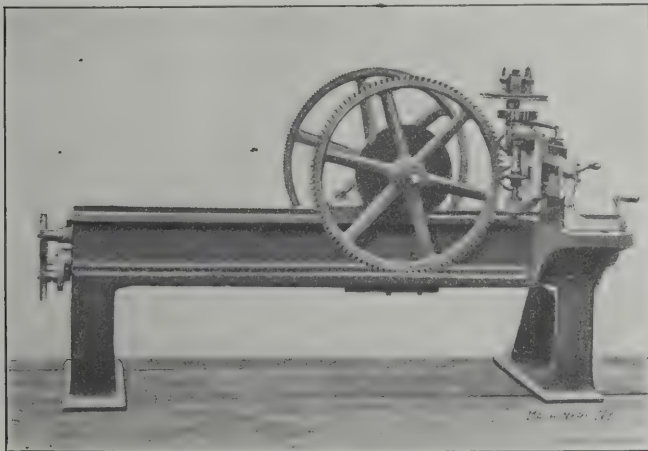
Gear-cutting Machine, Joseph Whitworth & Co. (1868)
